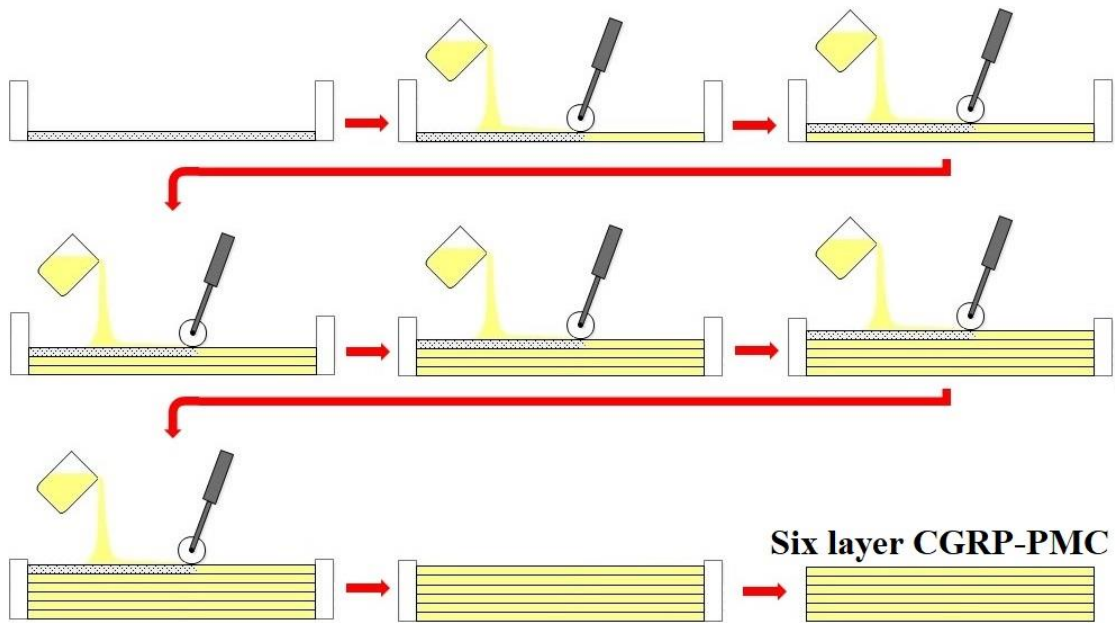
Schematic view of Six-layer CGRP-PMC fabrication
